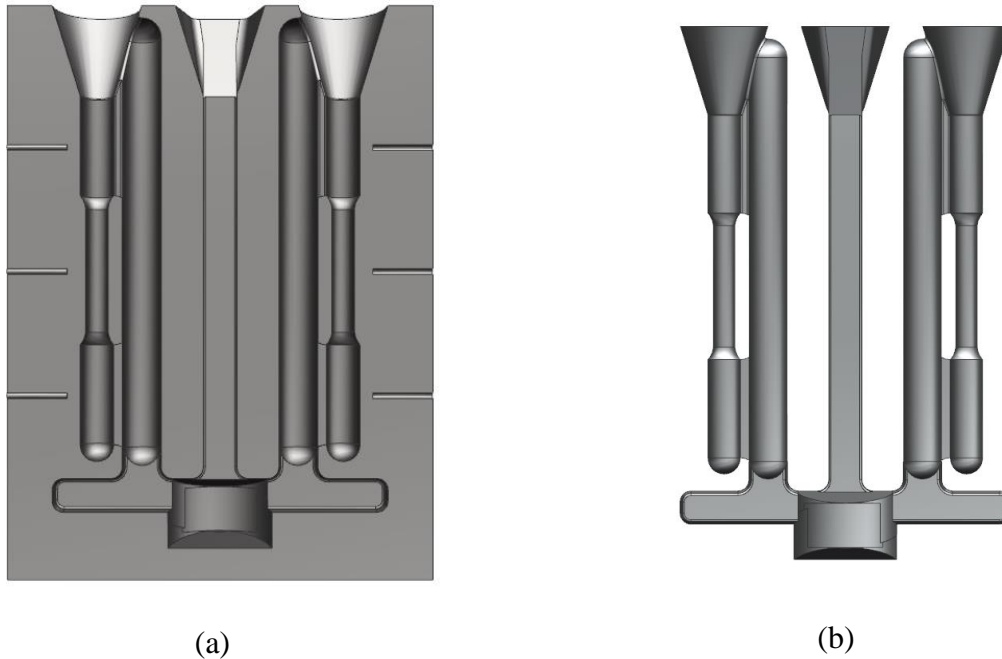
(a) ASTM standard (B108-06) permanent tensile mould (b) resultant casting
